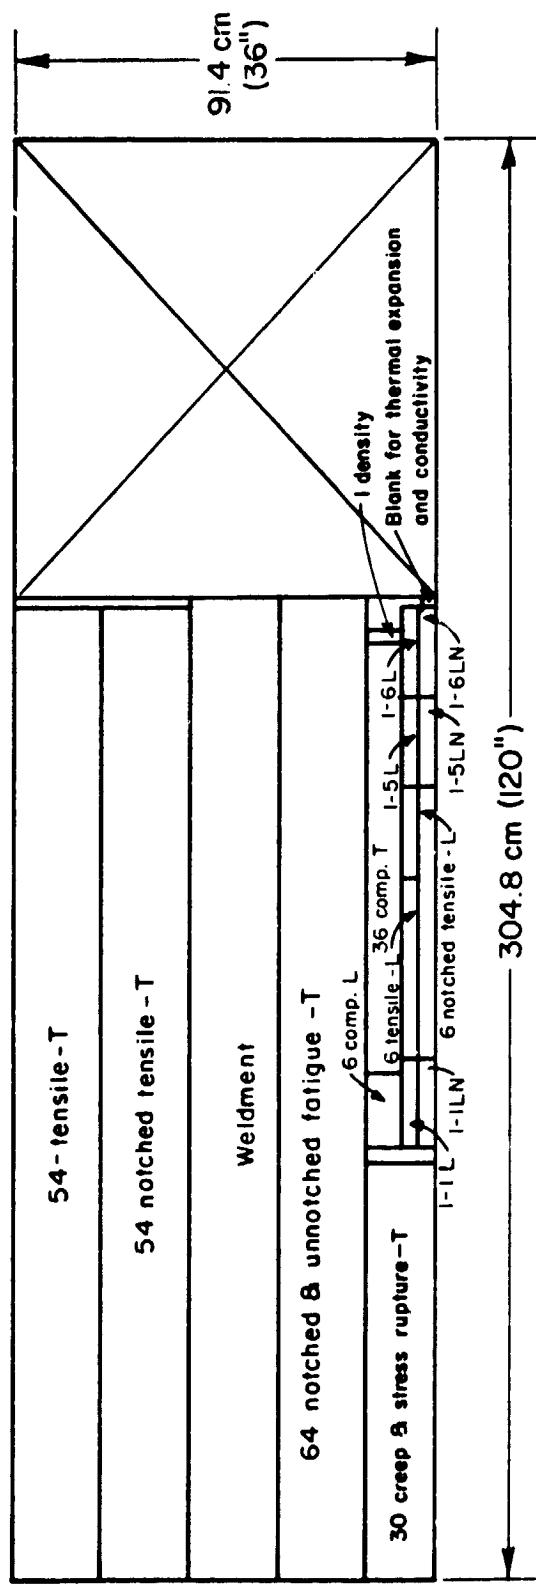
SPECIMEN LOCATION FOR INCOLOY 903 SHEET
